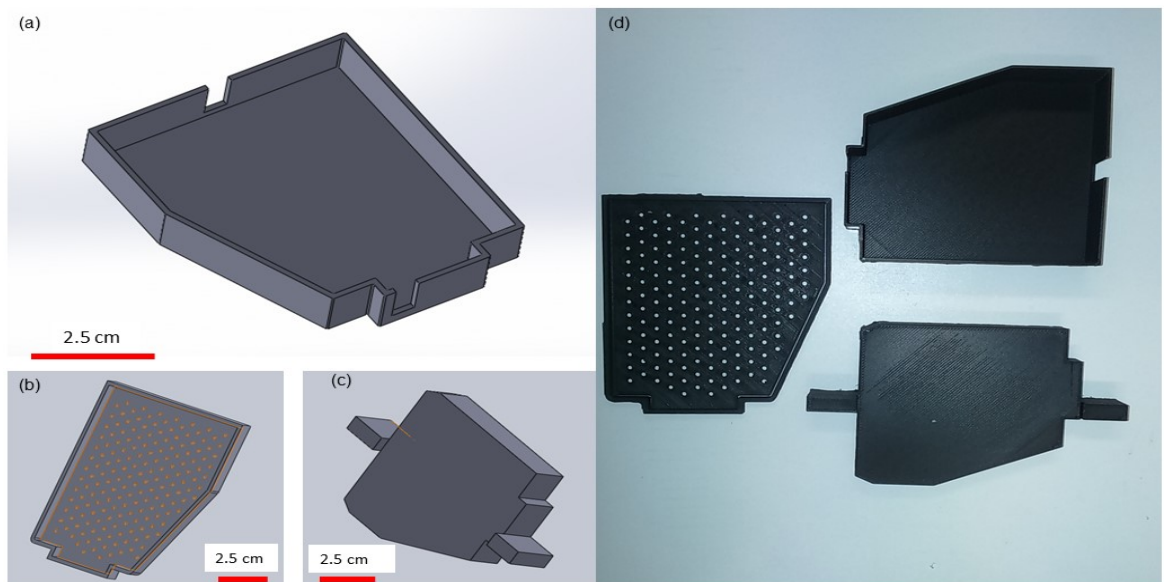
The three components of the mold for palm artificial skin before assembly. The CAD design of a) Lower component, b) Upper component and c) Core of the mold. d) The 3D printed mold of palm skin
